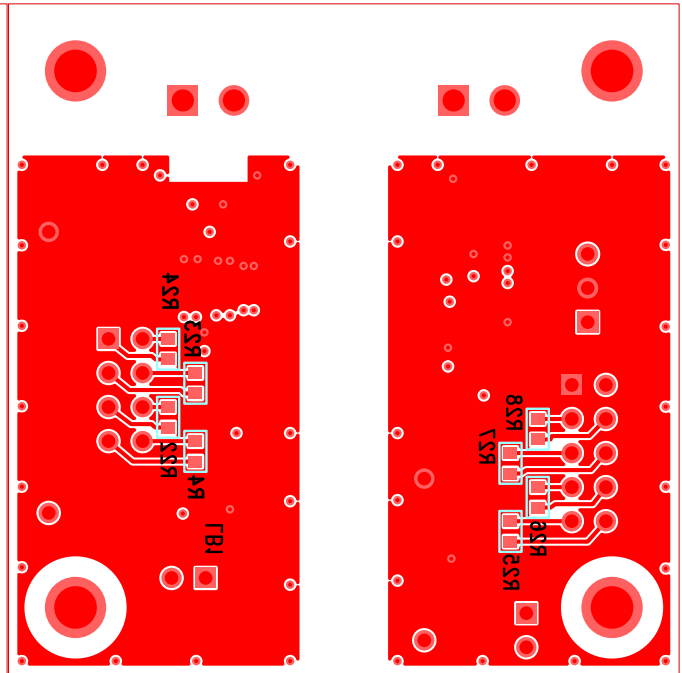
Bottom Layer of the SI86Pxxx Evaluation Board
